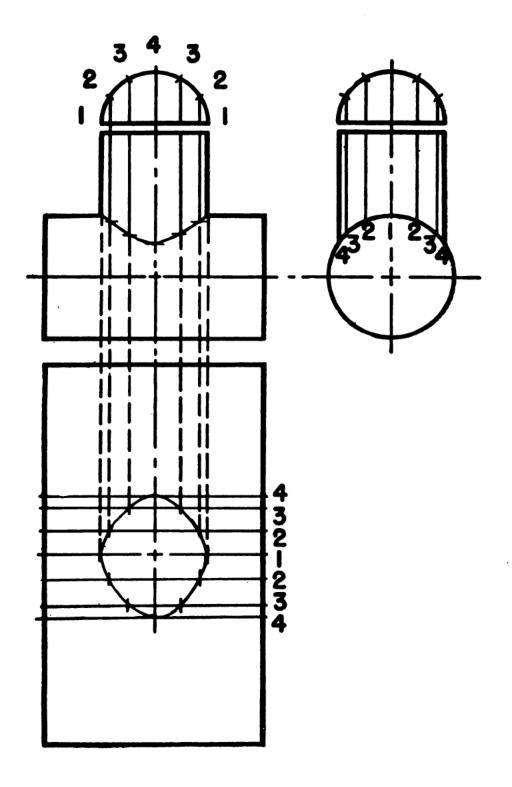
Stretch-out of the horizontal pipe in a T-joint.
